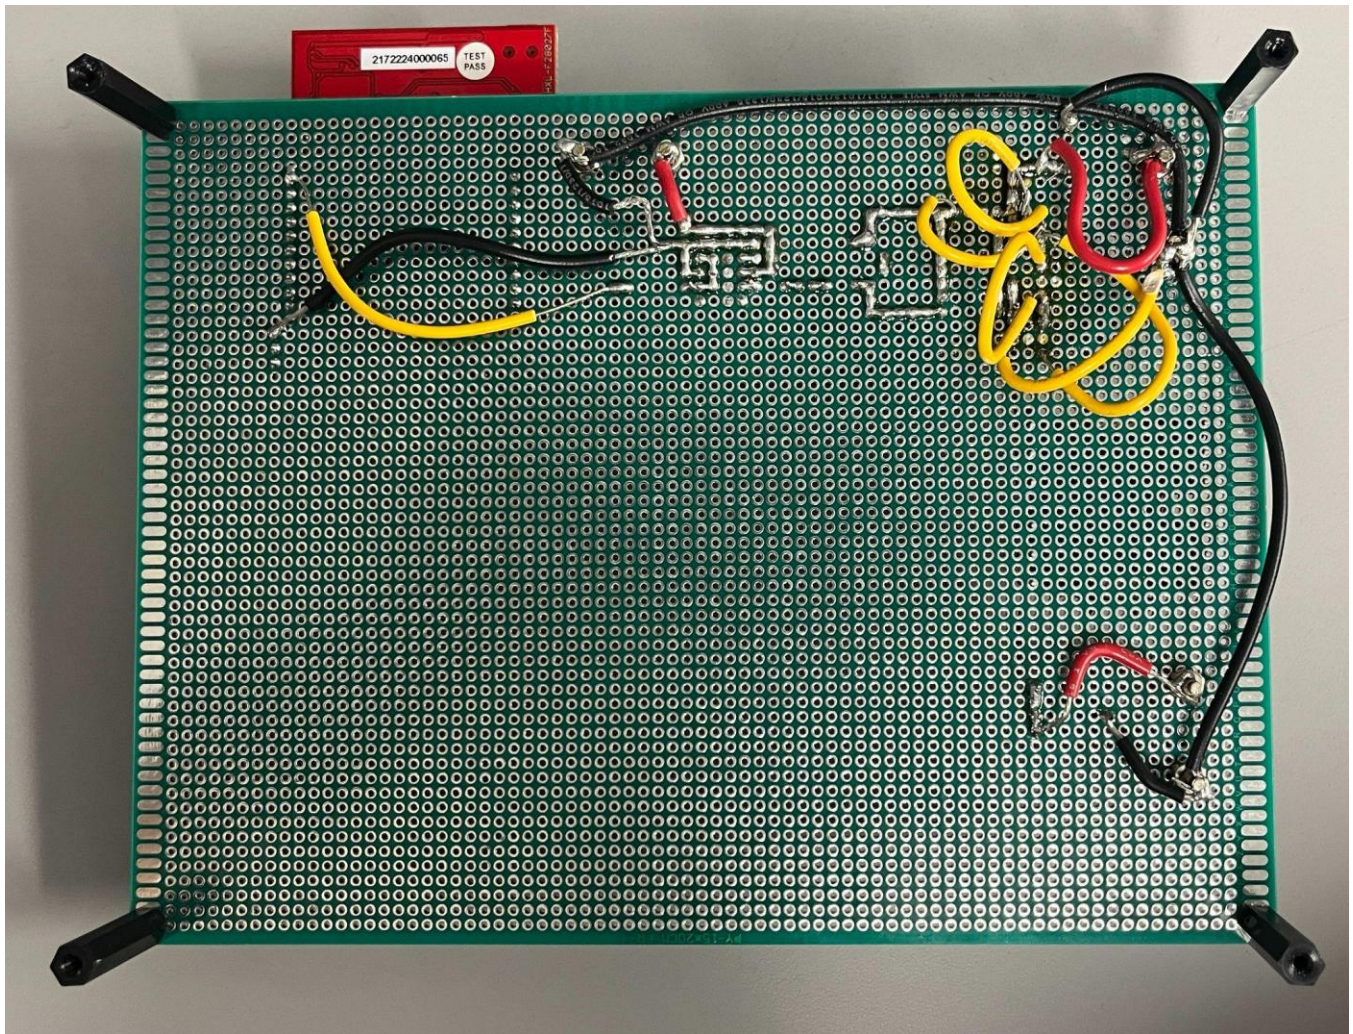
Buck Converter and Gate Driver Circuit Bottom View
